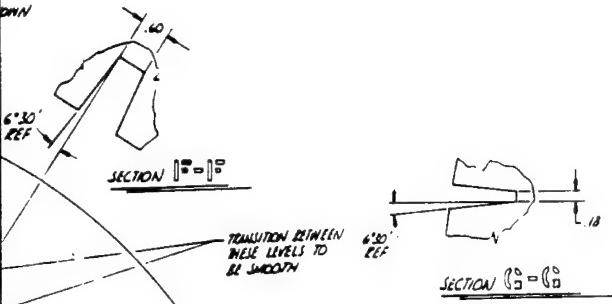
Base Disc Mold - Helicopter Transmission Housing (WRD Drawing No. 4696).
